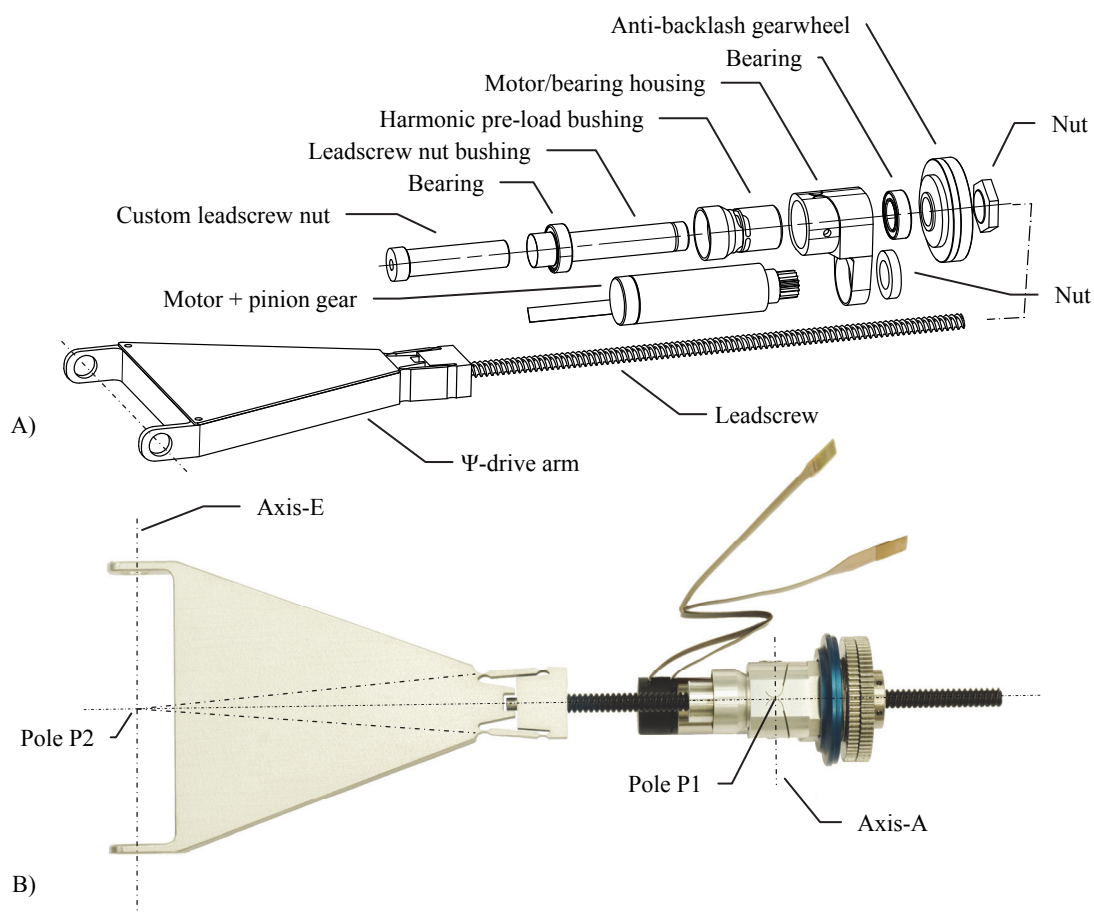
/ The Ψ -drive in A) exploded view and B) realized Z-drive, indicated with centerlines.
